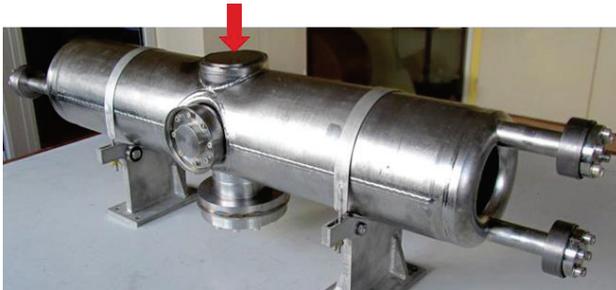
prototype 2 after the plunger port removal. The red arrow points on the welded niobium closing disc.
